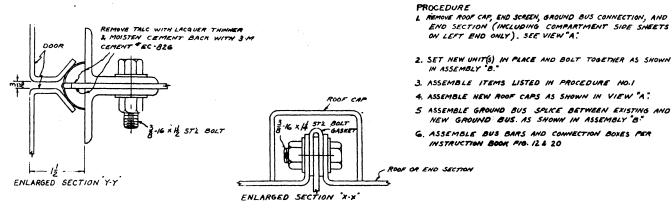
Outdoor Metal-clad Switchgear - Addition of Units to Line-up
